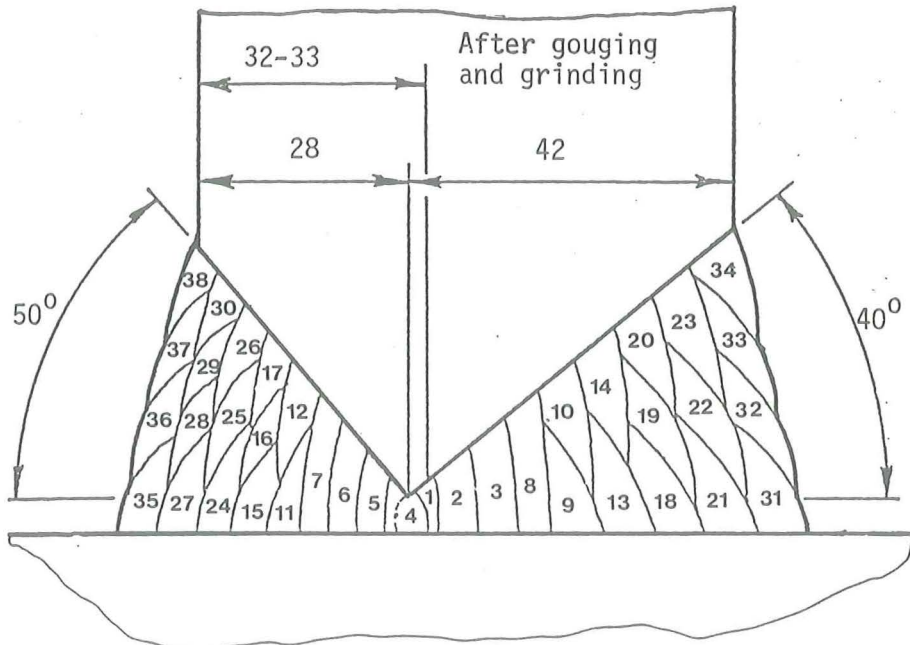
Build-up sequence of 70 mm full penetration welds .
